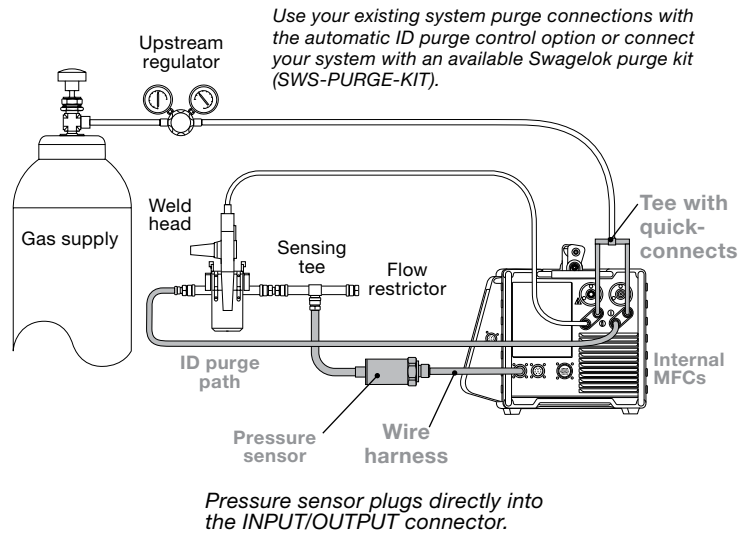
Typical Automatic ID Purge Control System Configuration
